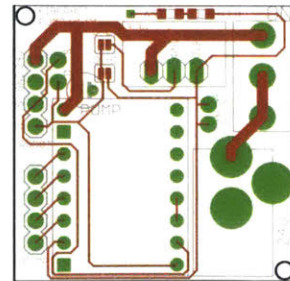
Base PCB 'Pump Board', Image Levi Cai, Mediated Matter.
